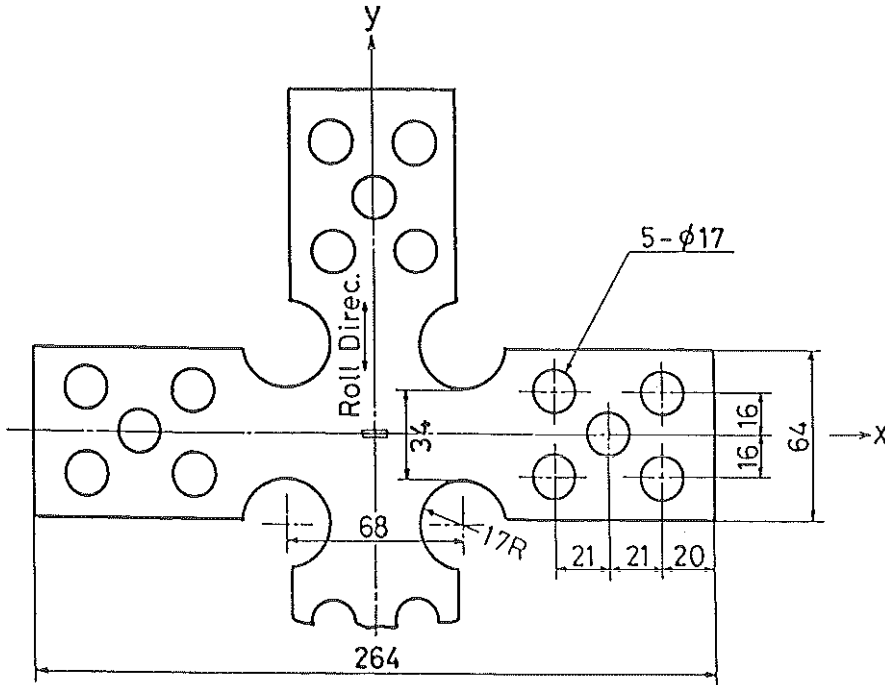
Cruciform specimen geometry (all dimensions in mm)
